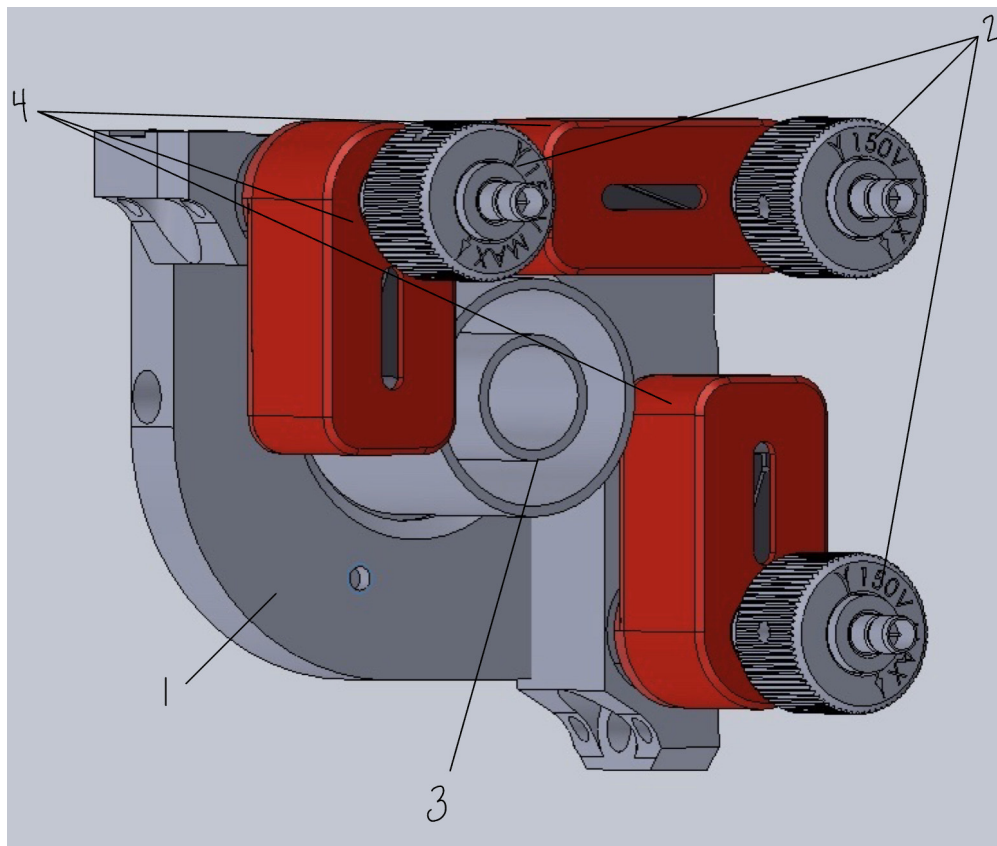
An alternate isometric view of the piezo screw mirror mount design showing bottom of the mount. 1 is the Newport 8817-6-UHV mirror mount. 2 are the custom piezo screws in 2.3. 3 is the bottom of the lead bullet. The ring-shaped pocket will be filled with lead in real life. 4 are the slip-stick piezos installed on the Newport 8817-6-UHV mirror mount.
